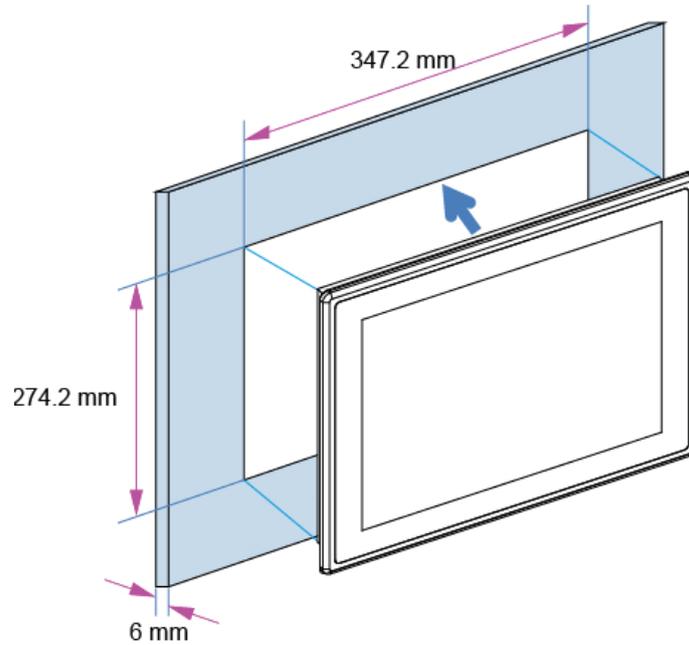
Panel Mount Cut-out hole and maximum panel thickness (QTM-1500)
